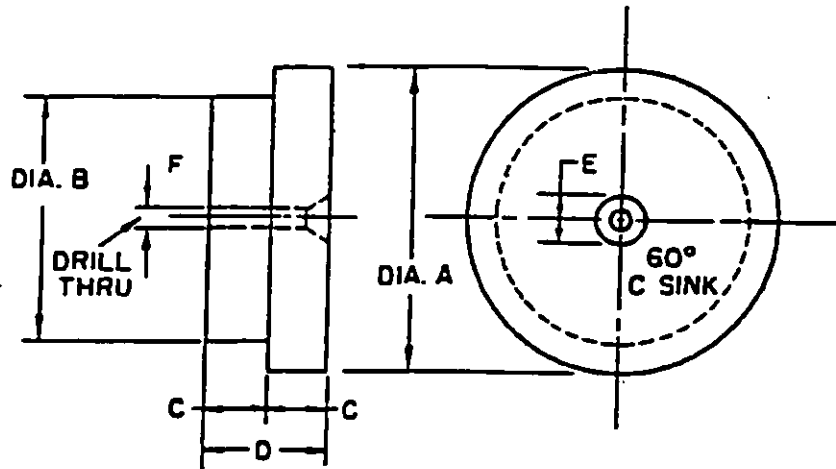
Type XIII, class 4, puller adapter, mechanical, gear and bearing, step plate.
